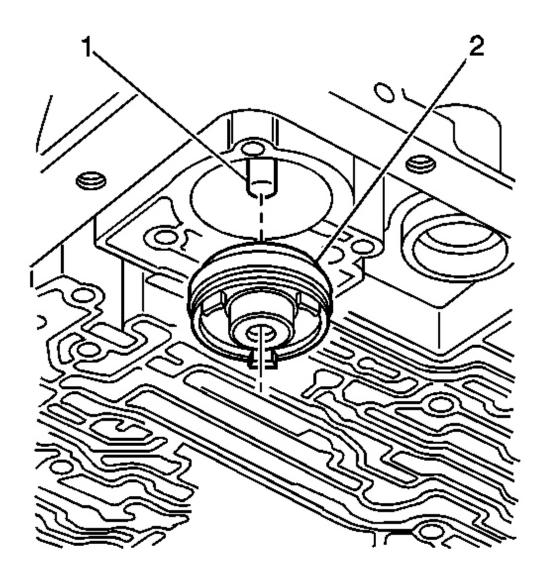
Identifying 3-4 Accumulator Piston Courtesy of GENERAL MOTORS CORP.
